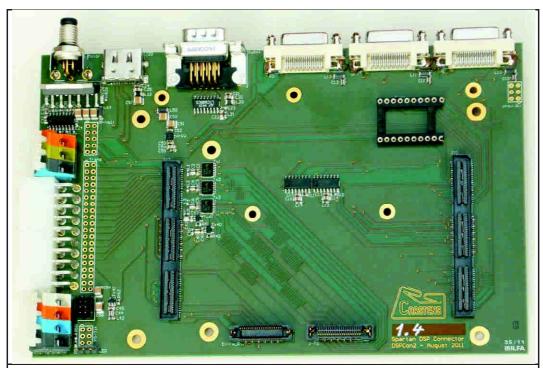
DSPCon Board – the FPGA Board will be here plugged.
